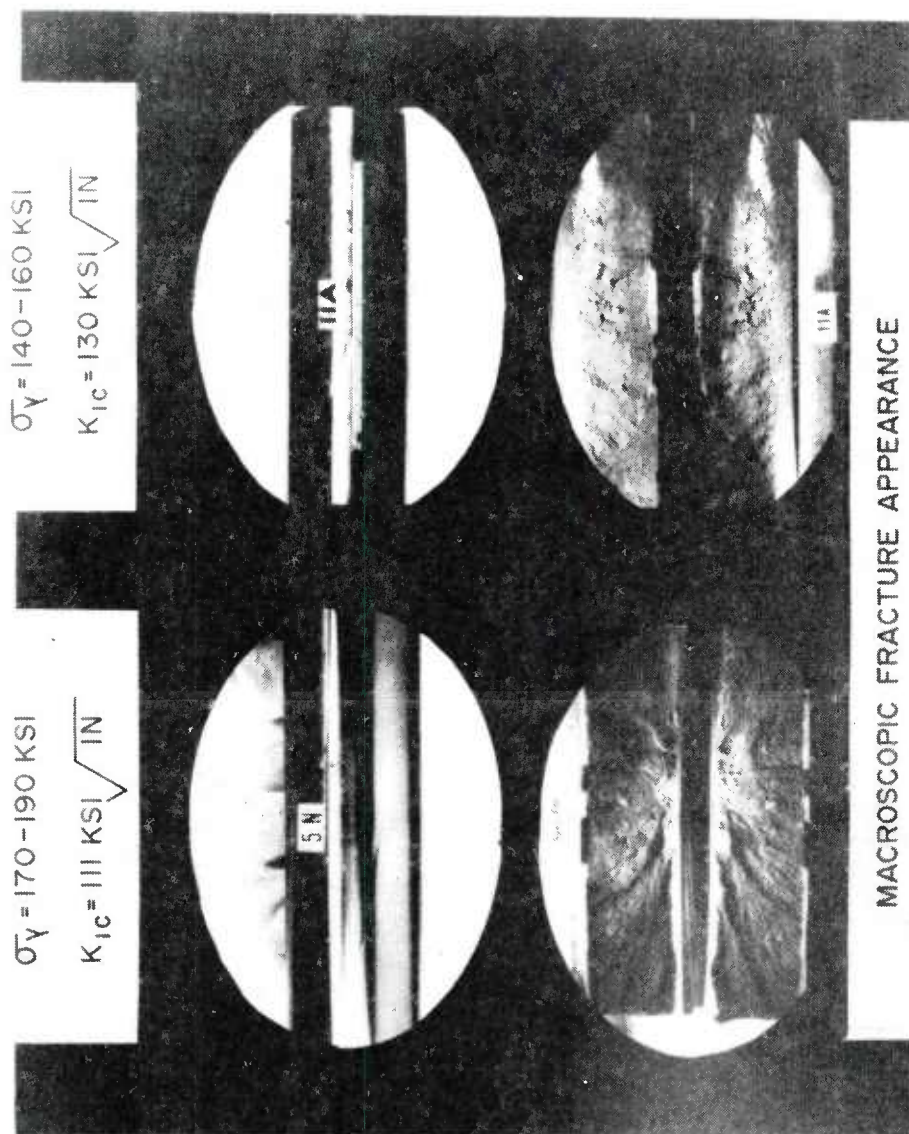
Macroscopic fracture appearance of fracture surfaces of cylinders with low and high fracture toughness showing the comparative critical crack depth at failure.
